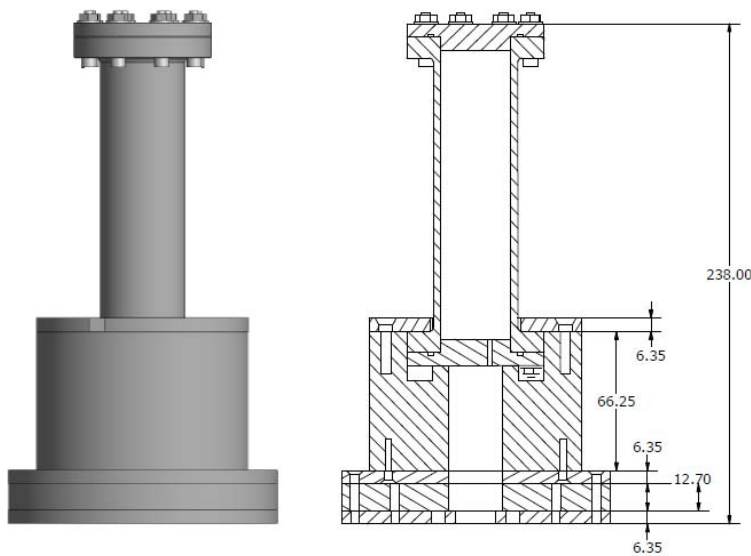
3D model and cut-section of the aluminum chamber and X-ray motor mounting base.
